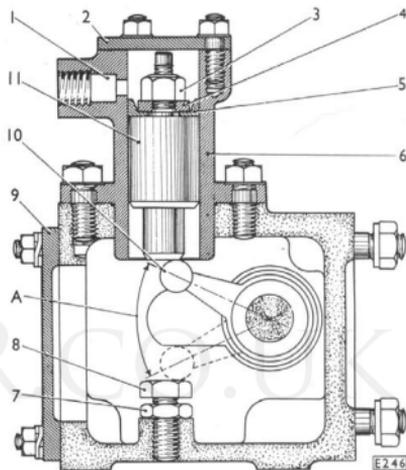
Section through throttle control motor showing travel of actuating lever at full throttle.
